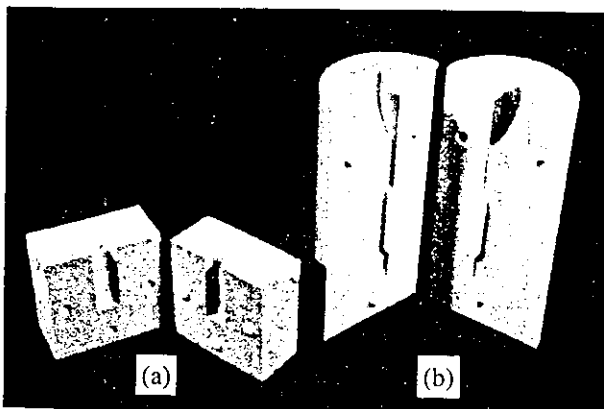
Gypsum molds. (a) cylindrical casting, (b) dumbbell-type casting.
